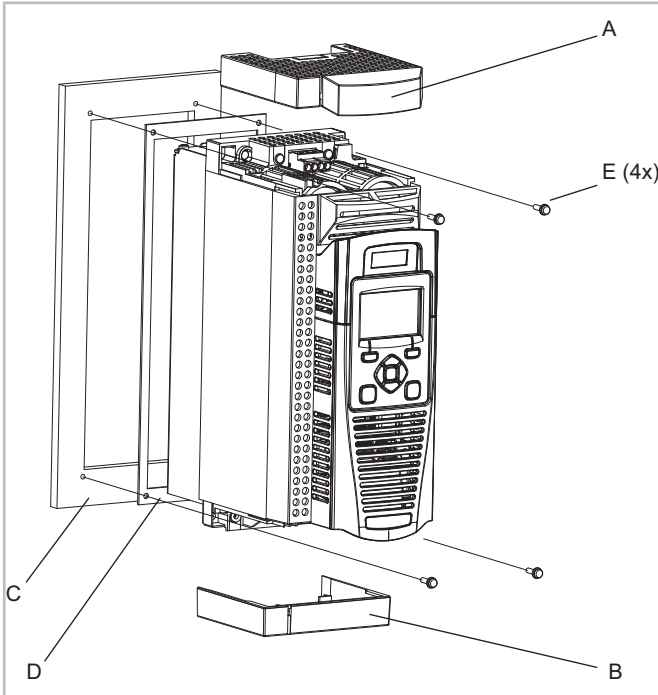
Detailed view of the through-switch cabinet mounting (example FDU)
